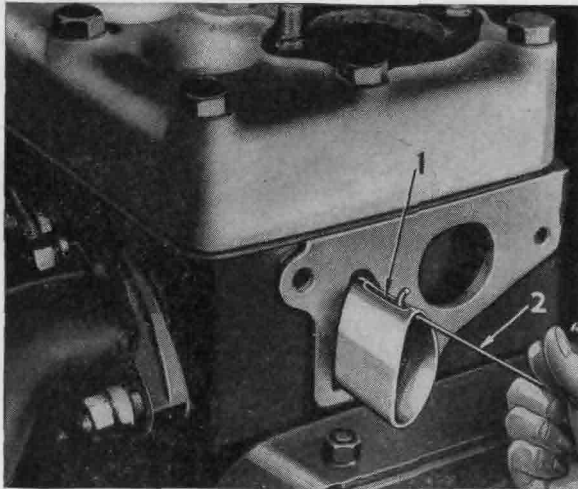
Water-distributing tube (1) being pulled by hook (2) from cylinder block. This tube, similar to the one shown in Fig. 13-5, has holes properly spaced to provide adequate cooling of valve seats. (*Plymouth Division of Chrysler Corporation*)
